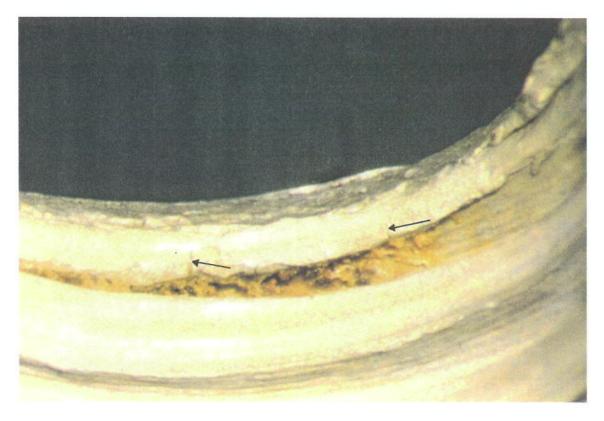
Two other radial cracks in the inner end of the same hole as that shown on figure 21  $$x\,36$$
